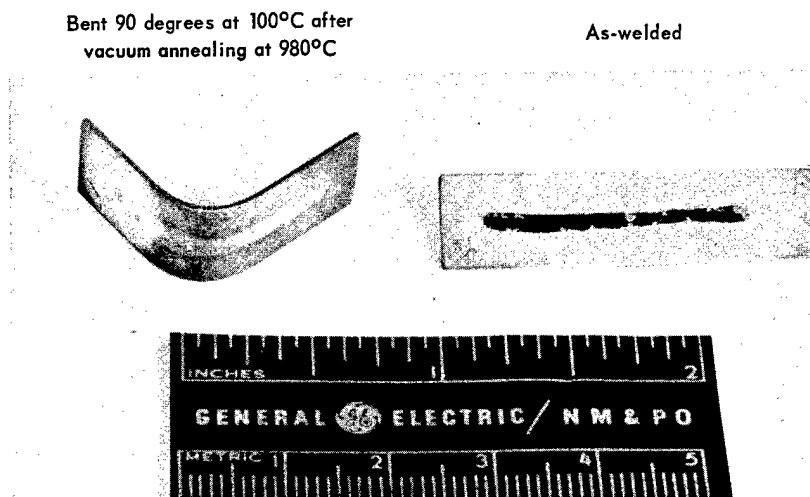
Welded Cr-Y alloy (M-313) bend specimens (Neg. P67-5-21)
